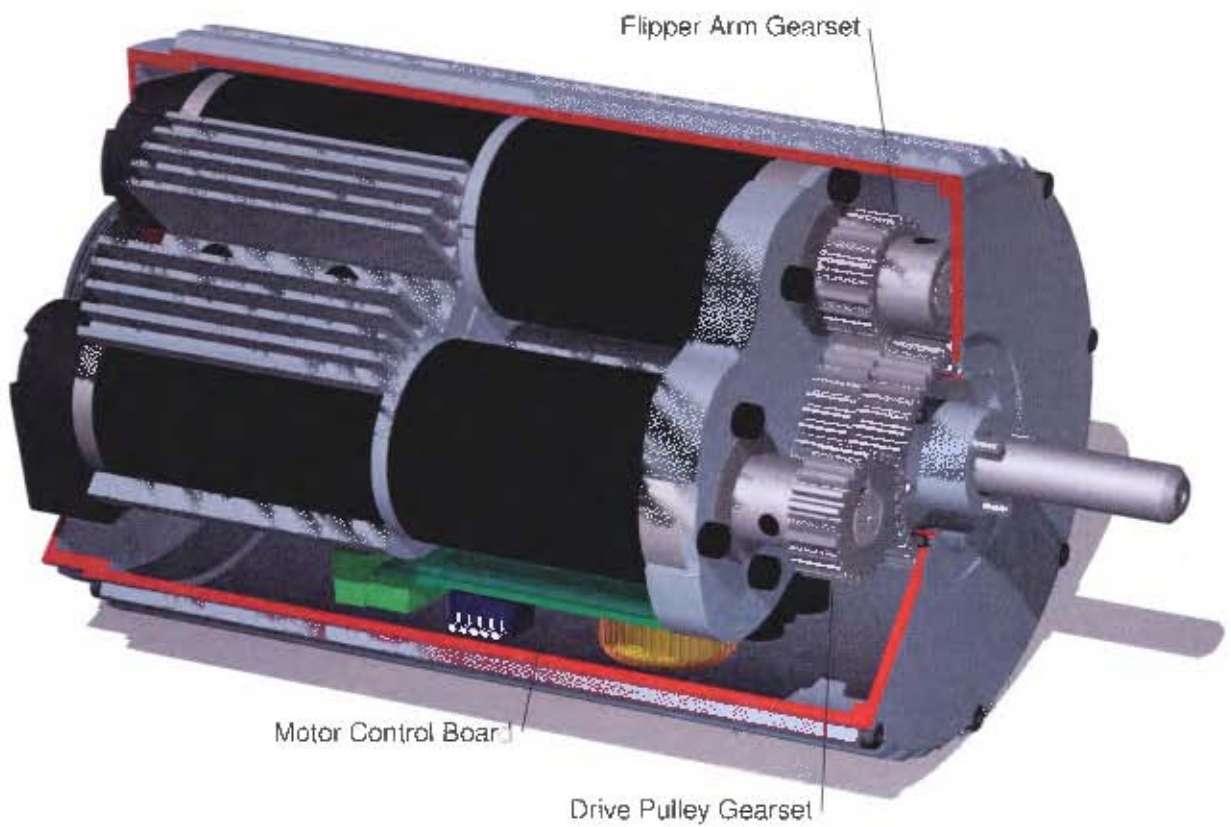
A cutaway view of the drive pulley showing the components inside the pulley.
